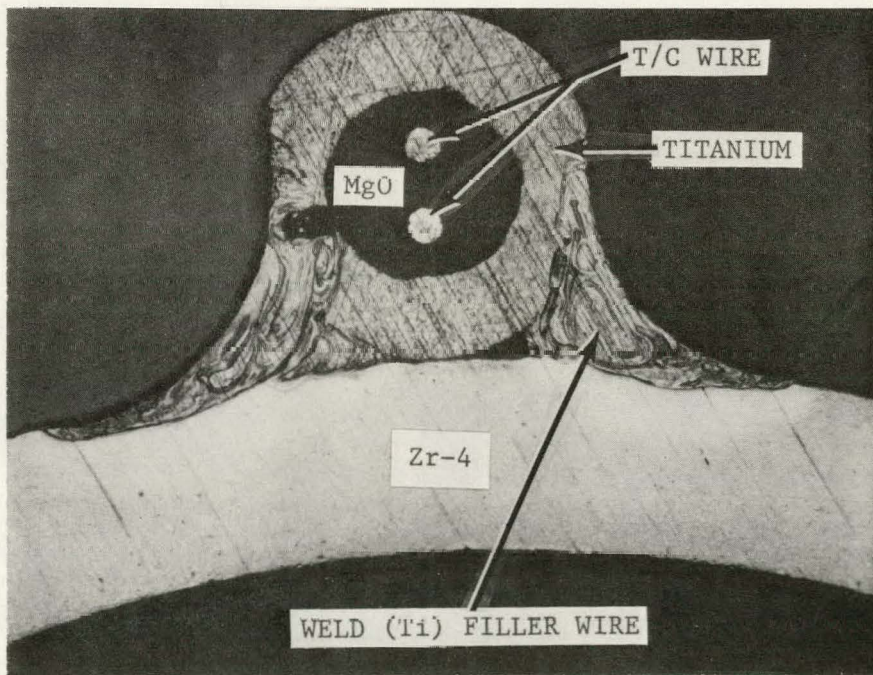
LOFT laser weld – penetrated T/C sheets.
